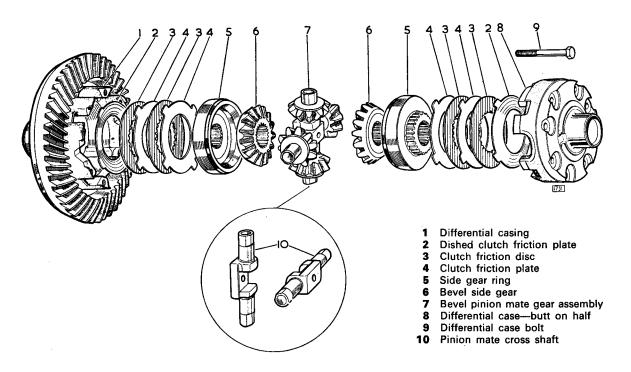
Exploded view of the "Powr-Lok" differential
